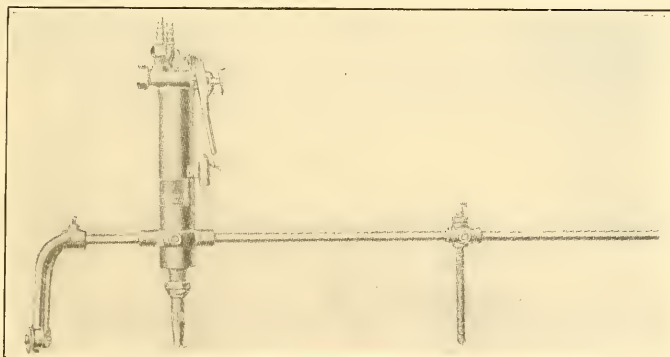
Radius Cutting Attachment for Straight-Tip Torch.
